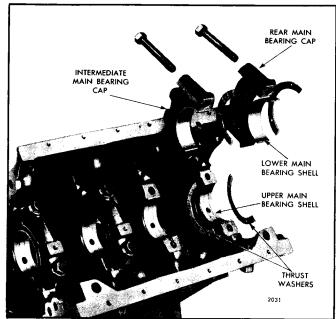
Main Bearing Shells, Bearing Caps and Crankshaft Thrust Washers – In-line Engines
